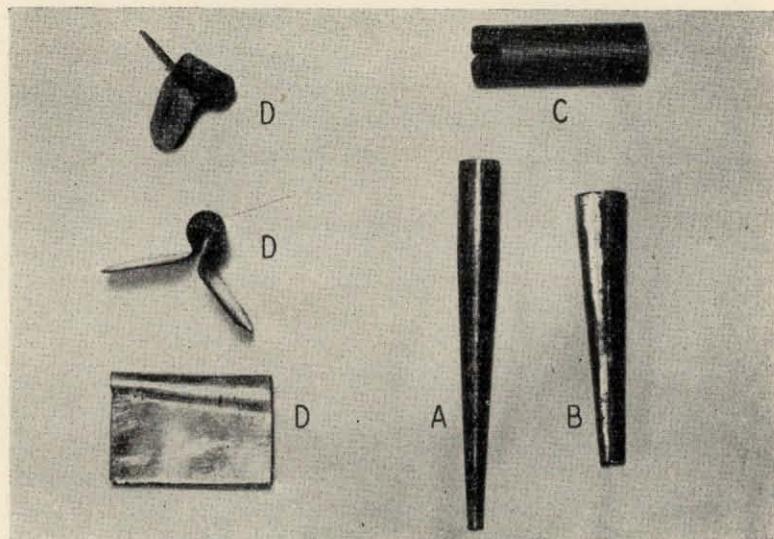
TOOLS USED IN GRINDING STOPCOCKS
